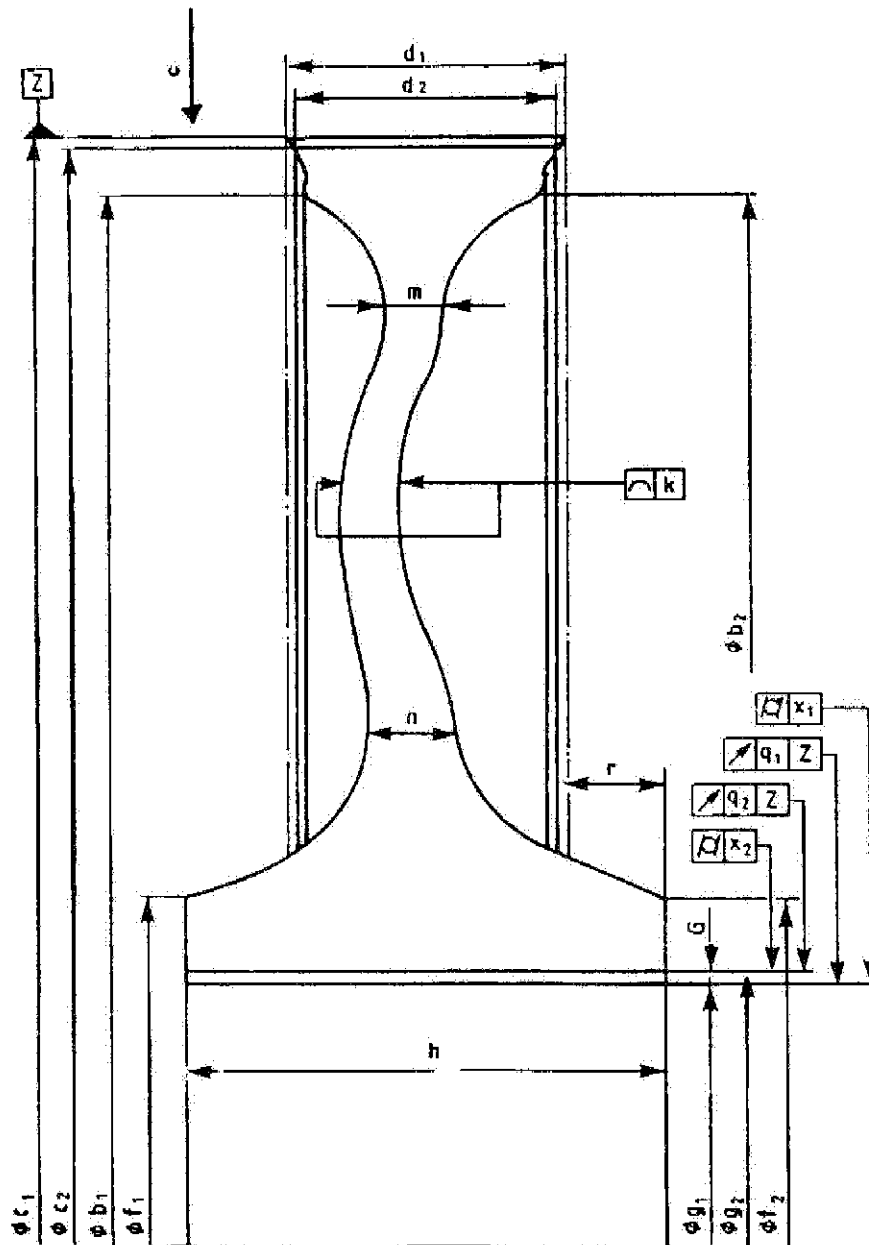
Symbol for dimensions and geometrical tolerances
